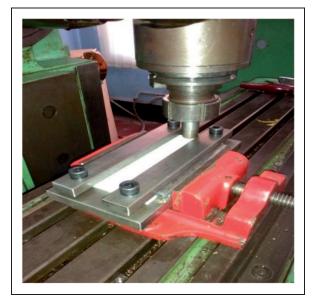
Experimental setup of the FSW process showing the designed fixture.
